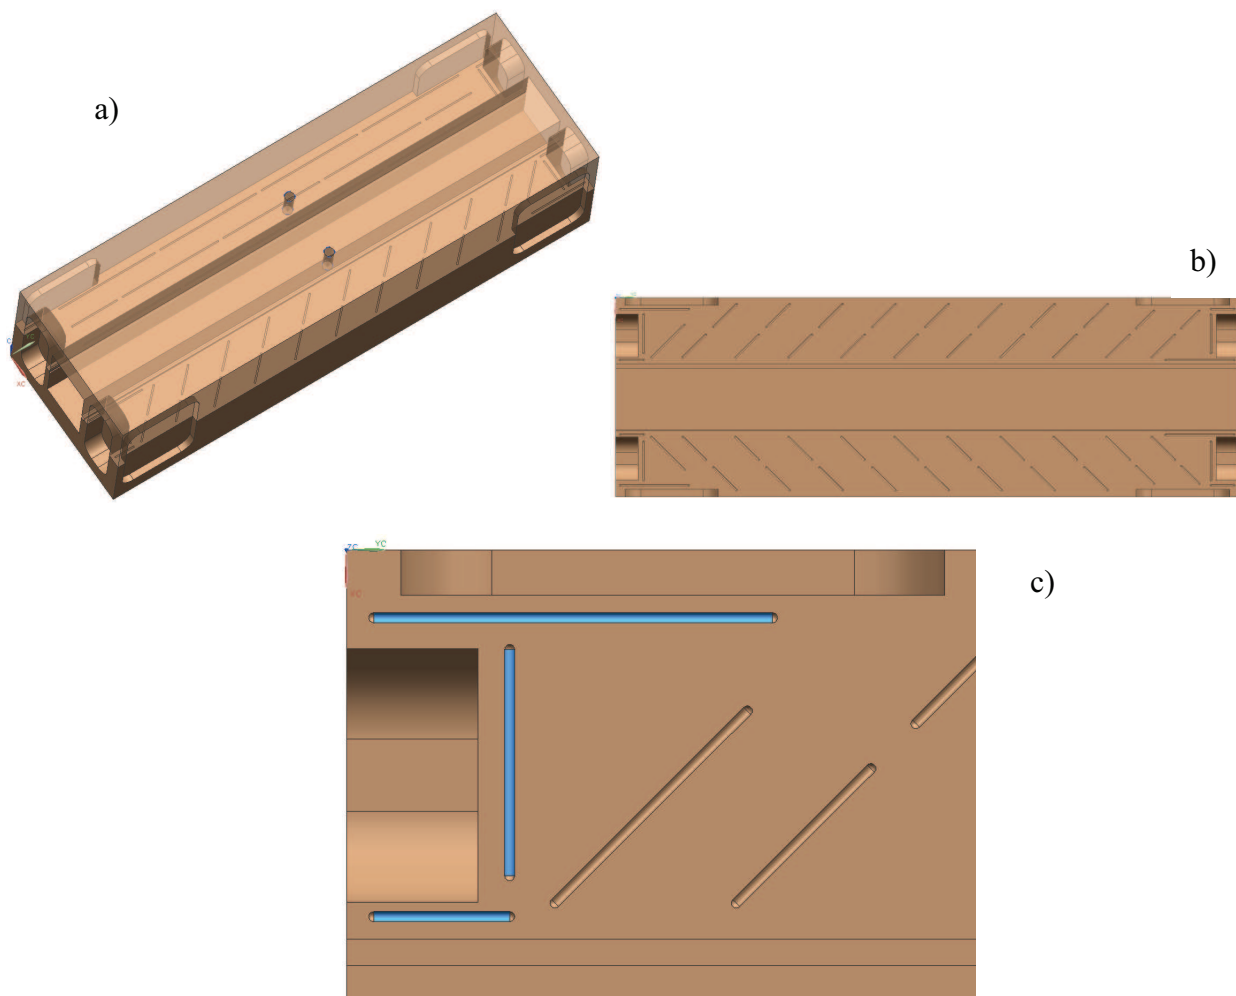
View of the C pieces for the vertical brazing test. (a) 3D view of the assembly; (b) side view of one piece, showing the grooves orientation tilted 45°; (c) detailed view of the grooves at one end.
